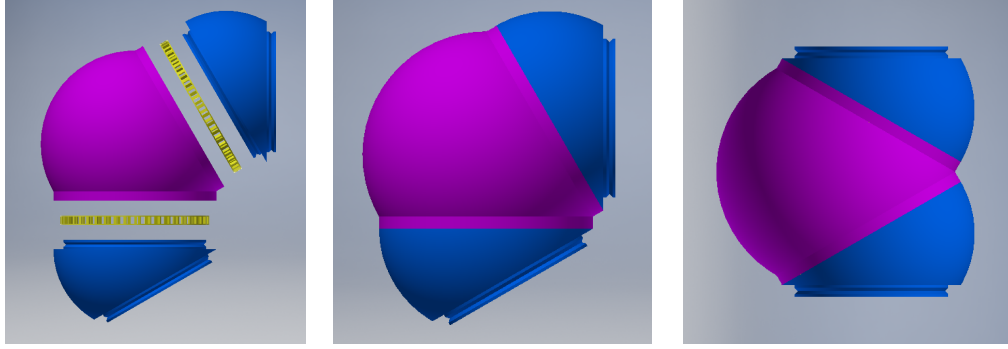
CAD assembly of prototype in bent and straightened orientations and with an exploded view.
